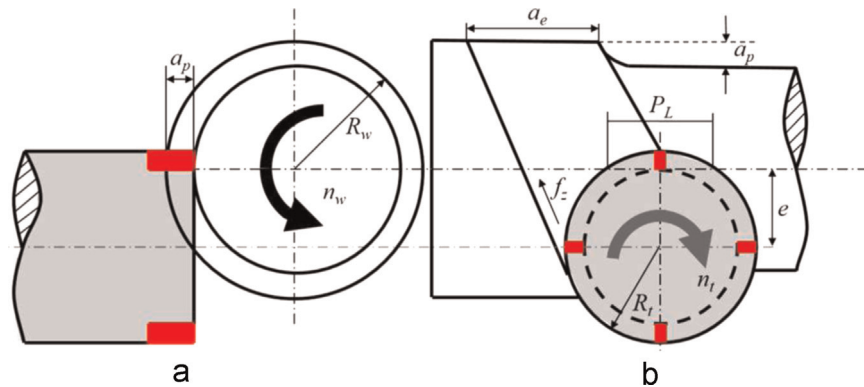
Cutting geometry in turn-milling. (a) Side view of the process. (b) Top view of the process.
